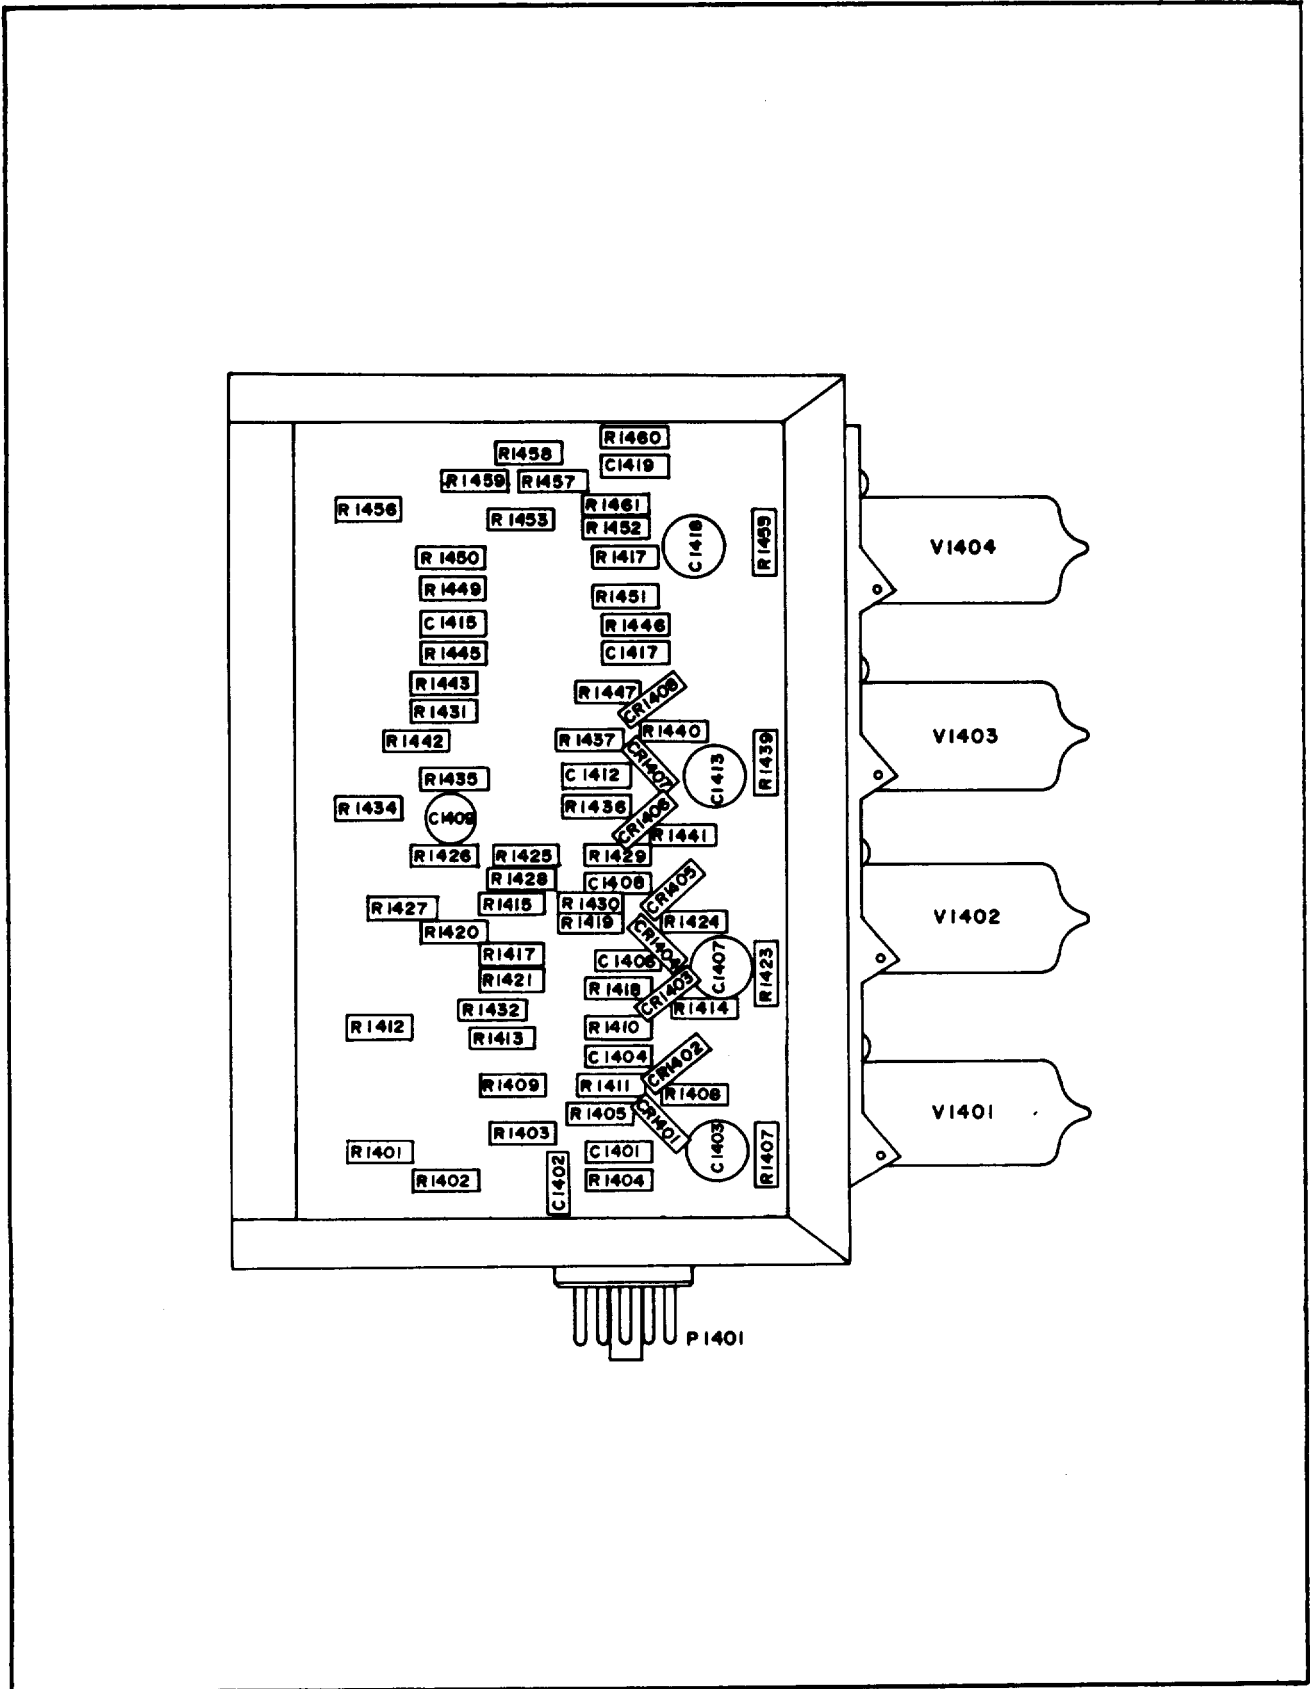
Right Side View Parts Layout of Decade Counter, Z-1200
